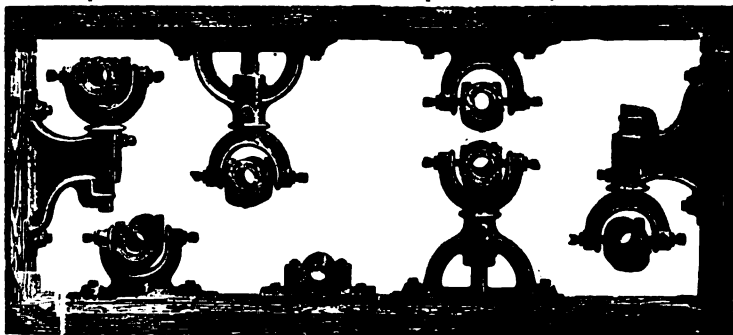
AMERICAN TOOL & MACHINE CO'S HANGERS.
